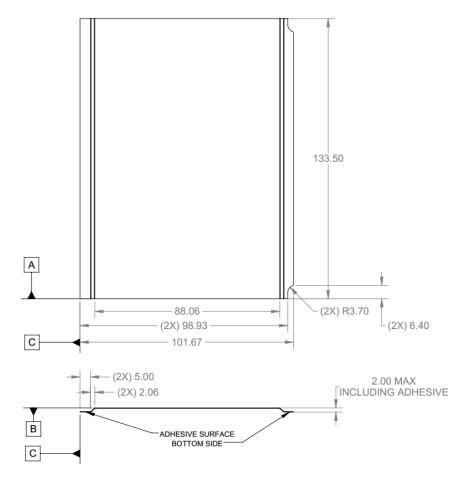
Large Card Bottom Side Insulator (Top and Side View)
